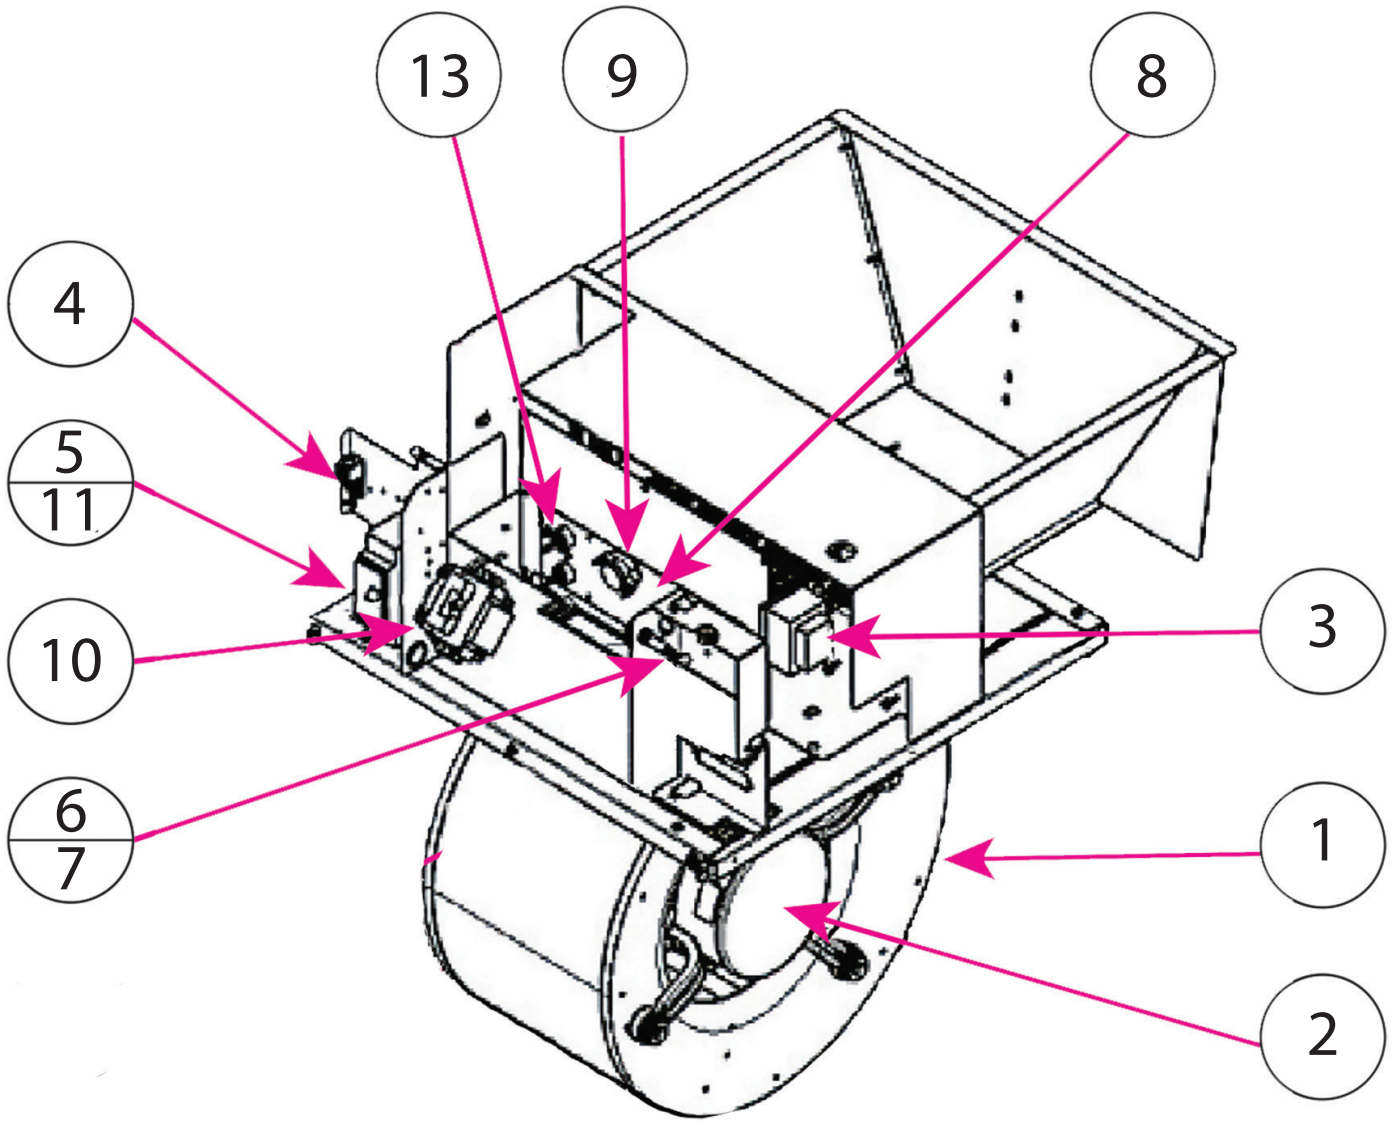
MMVT 24A, 36A Air Handler Replacement Parts Schematic
